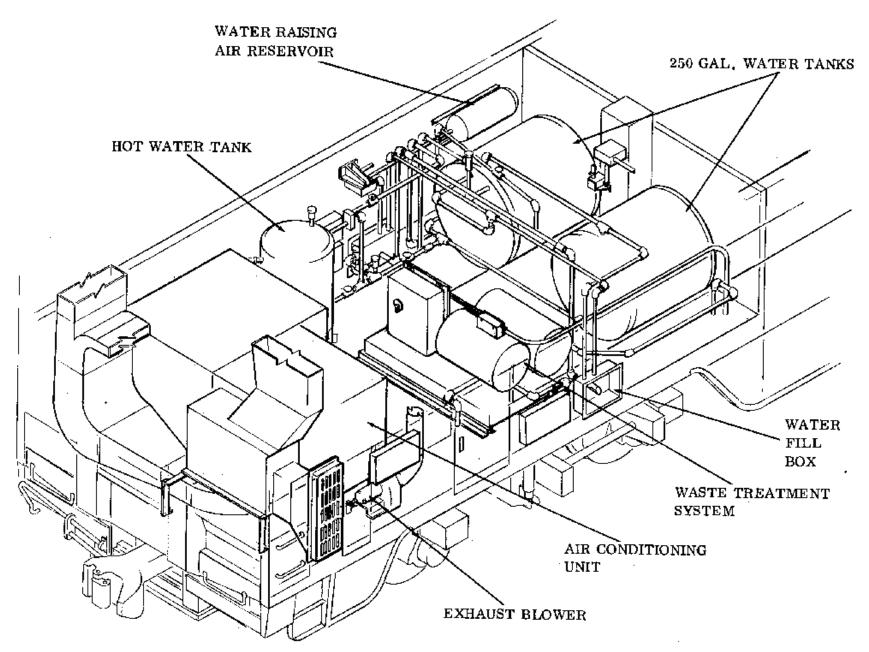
Equipment Room A-End - Coach & Sleeping Car
